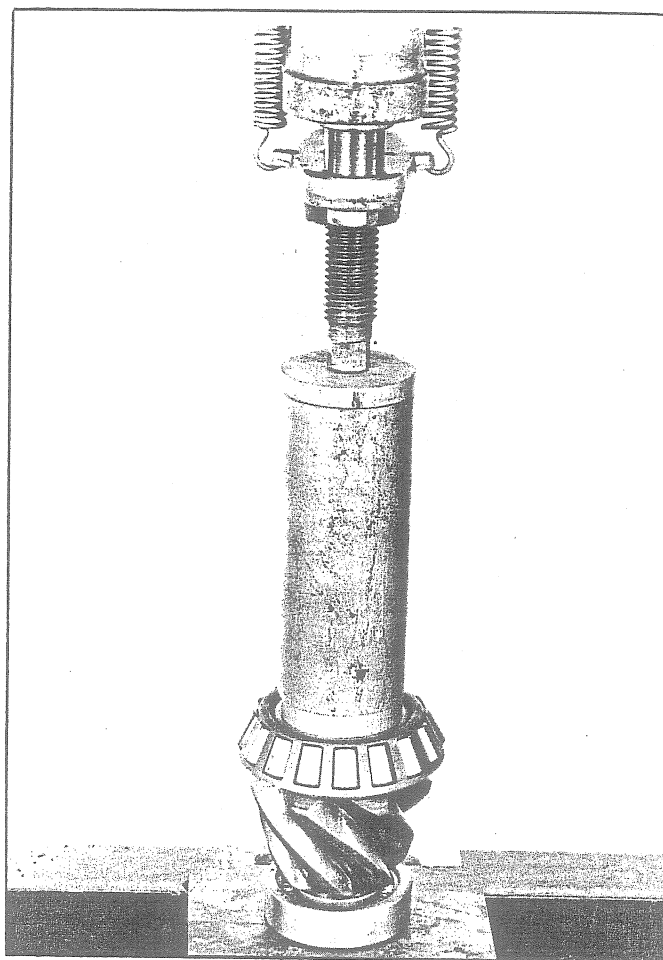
Pressing Center Bearing on Pinion Shaft
